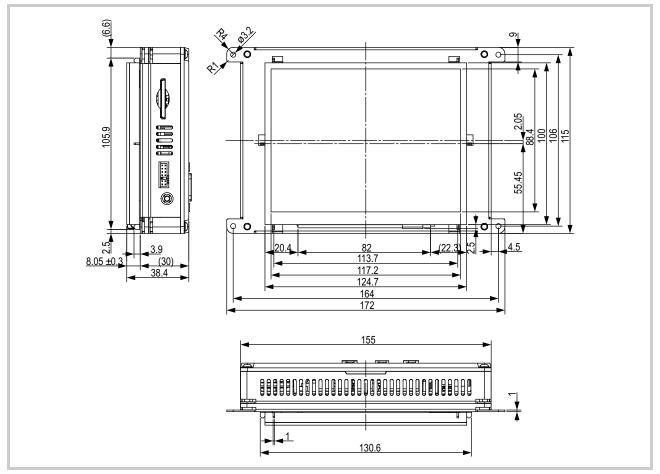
Mechanical dimensions of the 5.7" devices in mm
